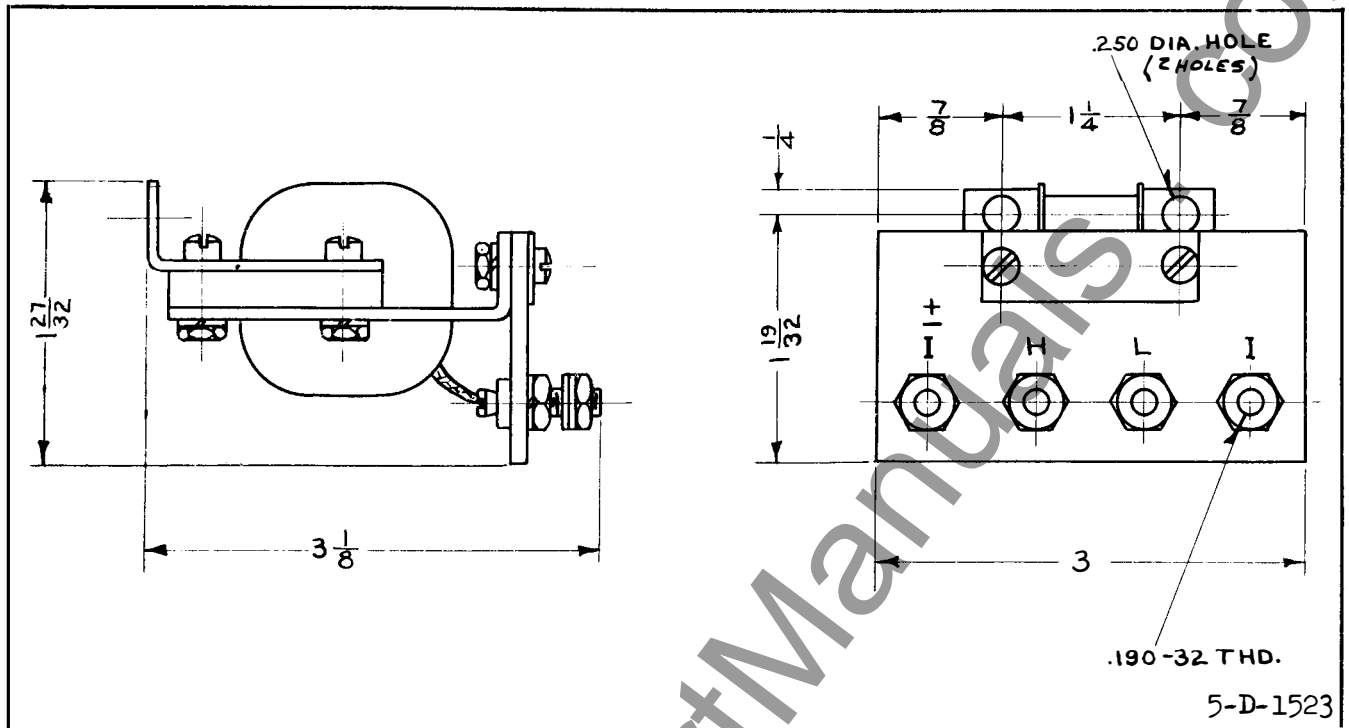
Outline of the Test Milliammeter Auxiliary Transformer.
